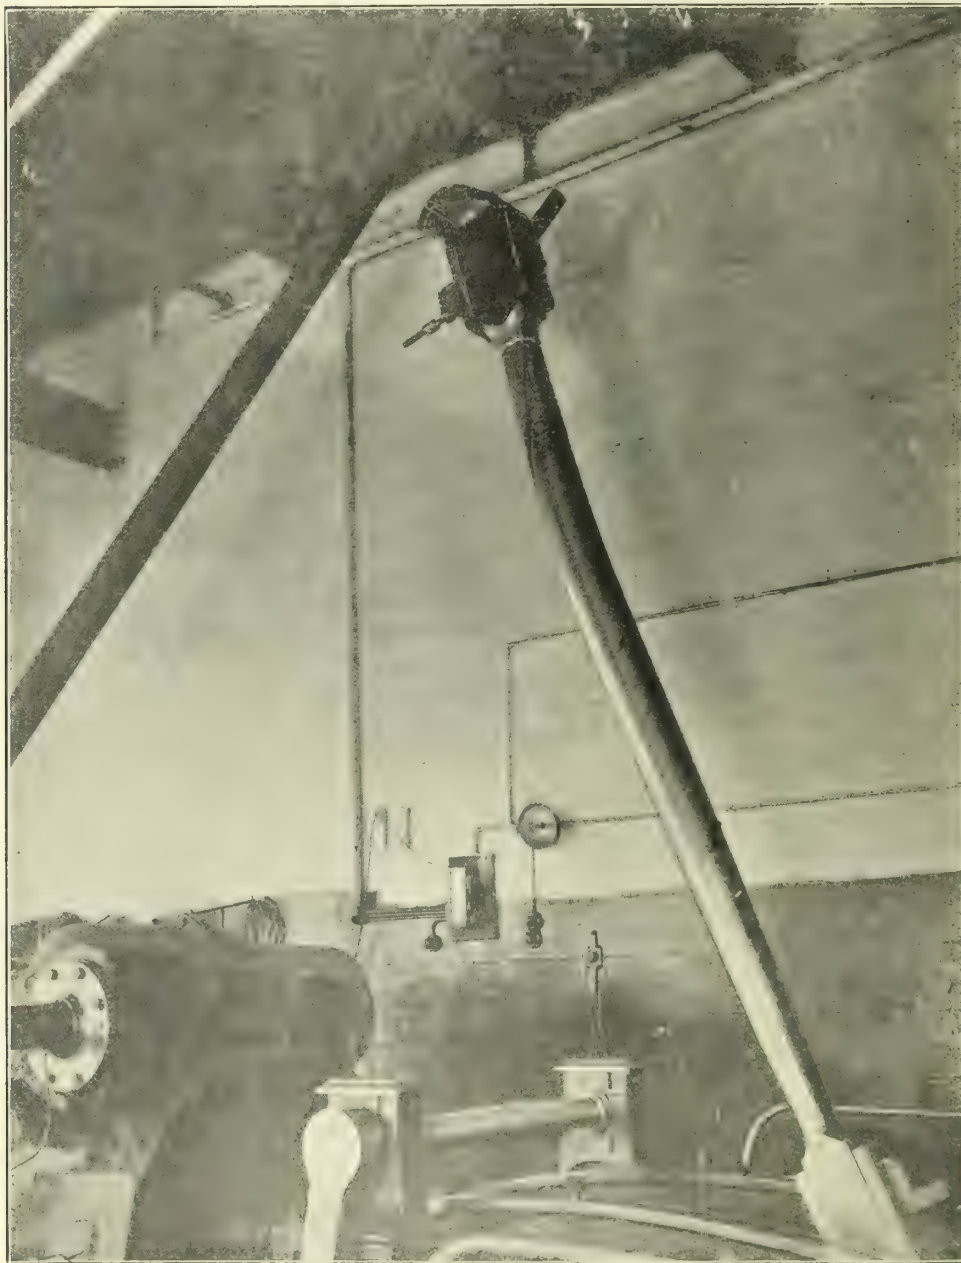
STEAM ENGINE BREAKDOWN. VIEW SHOWING POSITION OF CONNECTING ROD AFTER BREAKDOWN AND BROKEN STRAP. (See p. 27.)
